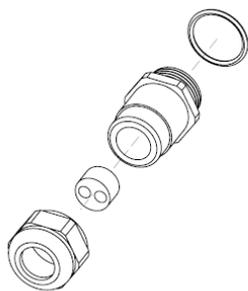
The XT-1 M20 cable gland with insert for 2 cables
